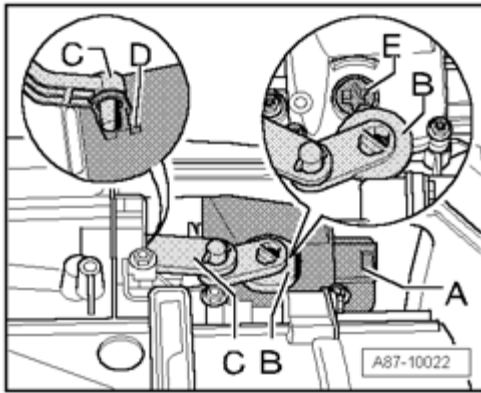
Identifying Connecting Element, Control Motor, Connecting Rod, And Lever
